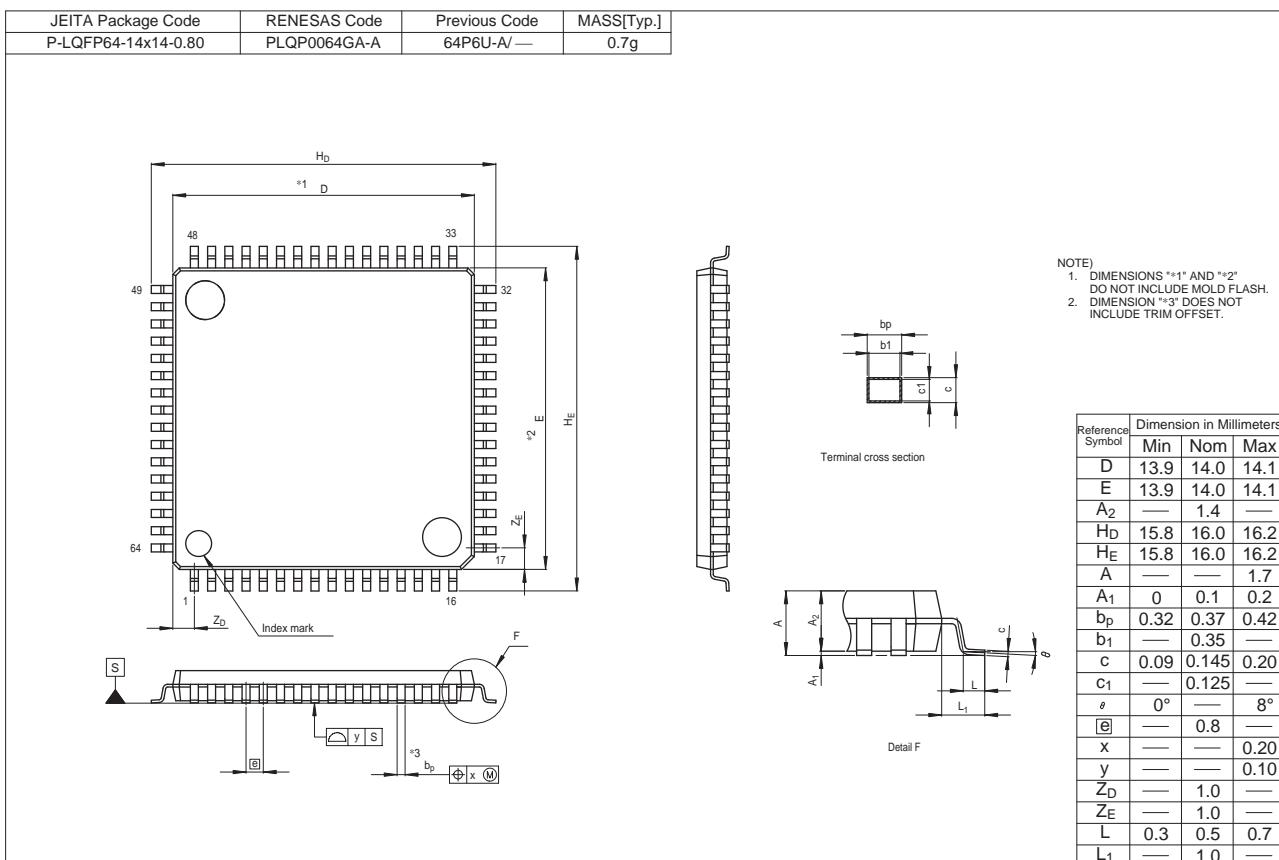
Pin LQFP (PLQP0064GA-A) Package Dimensions
